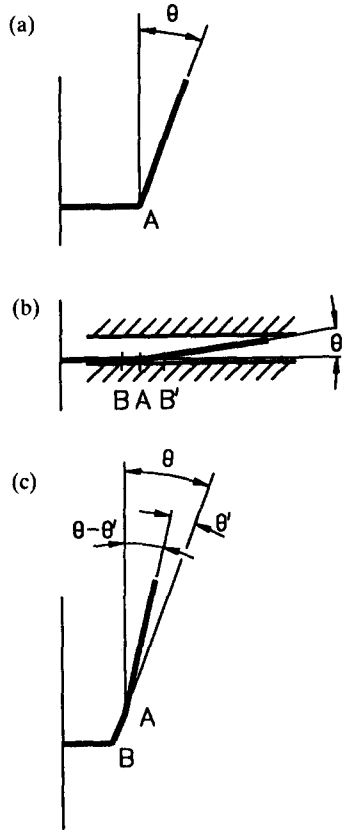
Basic mechanism of the double-bend technique (refer to [2]).
